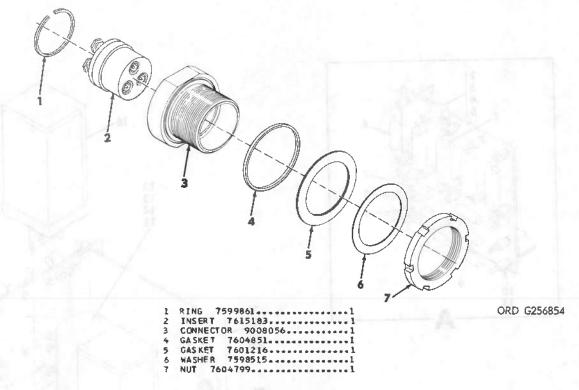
CONNECTOR, RECEPTACLE, ELECTRICAL /7606490/-EXPLODED VIEW /SFE FIGURE 236 FOR NEXT HIGHER ASSEMBLY/
